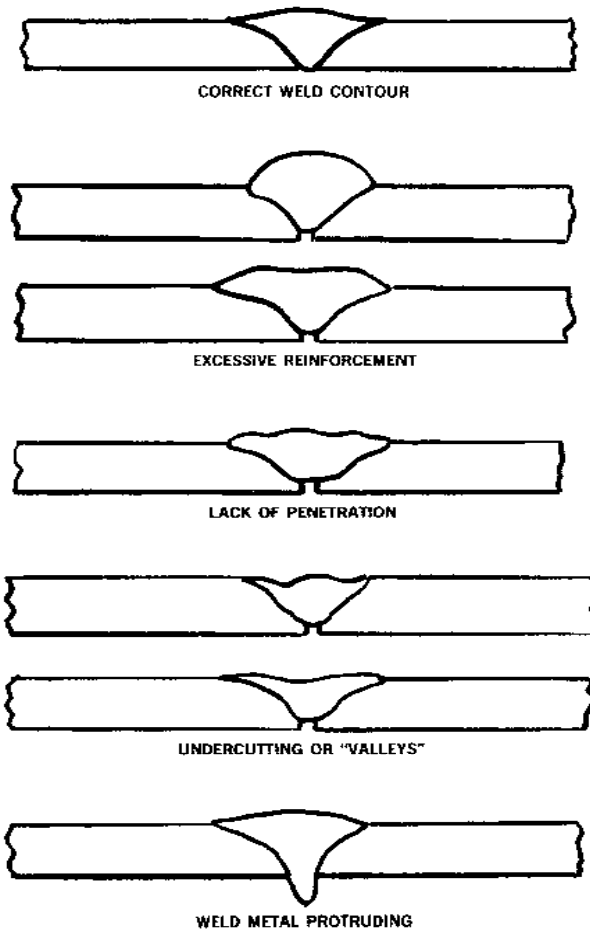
, Characteristics of Good and Bad Welding Joints
